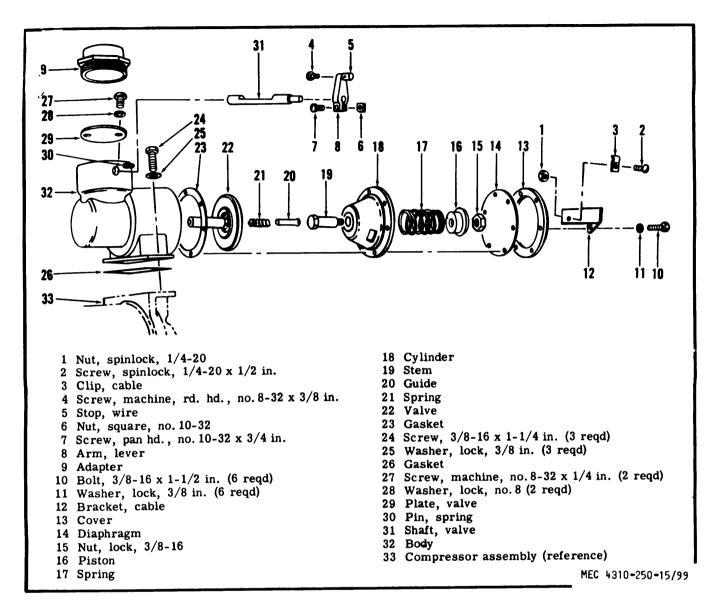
Air Intake-Unloader Assembly, Disassembly and Reassembly.
